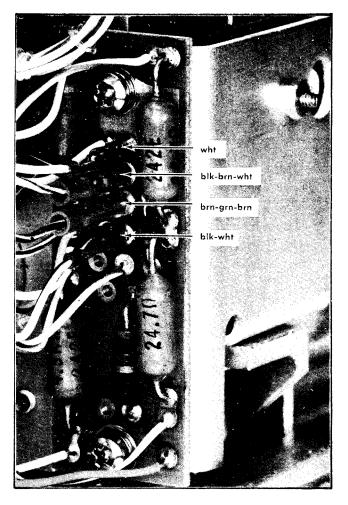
Connector assembly board for the RF oscillator assembly and wiring color code to the pin connector.
